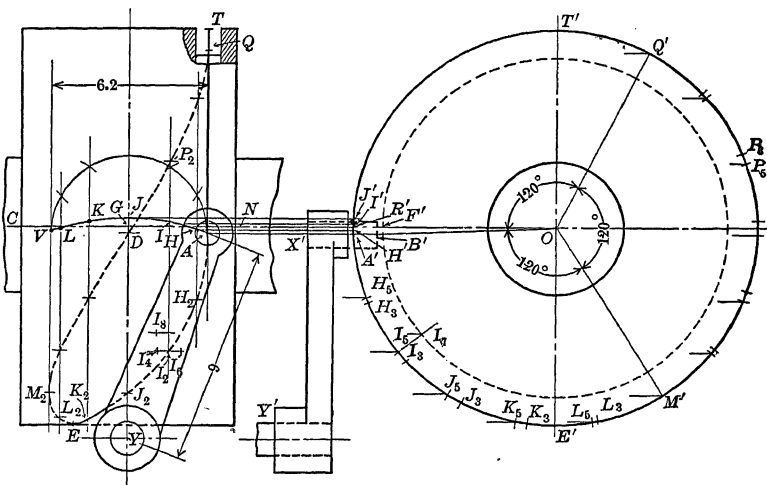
PROBLEM 16, CYLINDRICAL CAM WITH SWINGING FOLLOWER ARM
